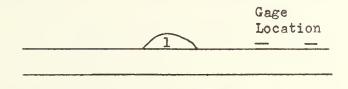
WELDING PASS SEQUENCE.
